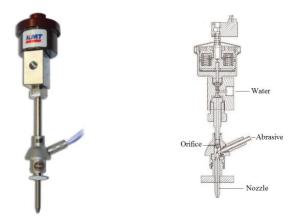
Cutting head Autoline Pro for pressure of 620 MPa
